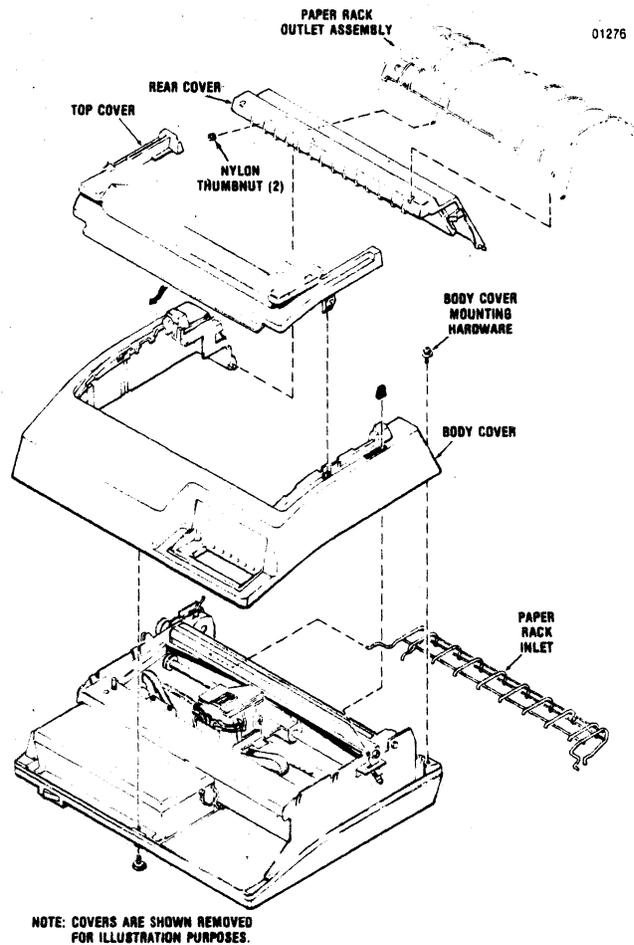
Installation Paper Rack Outlet and Paper Rack Inlet
